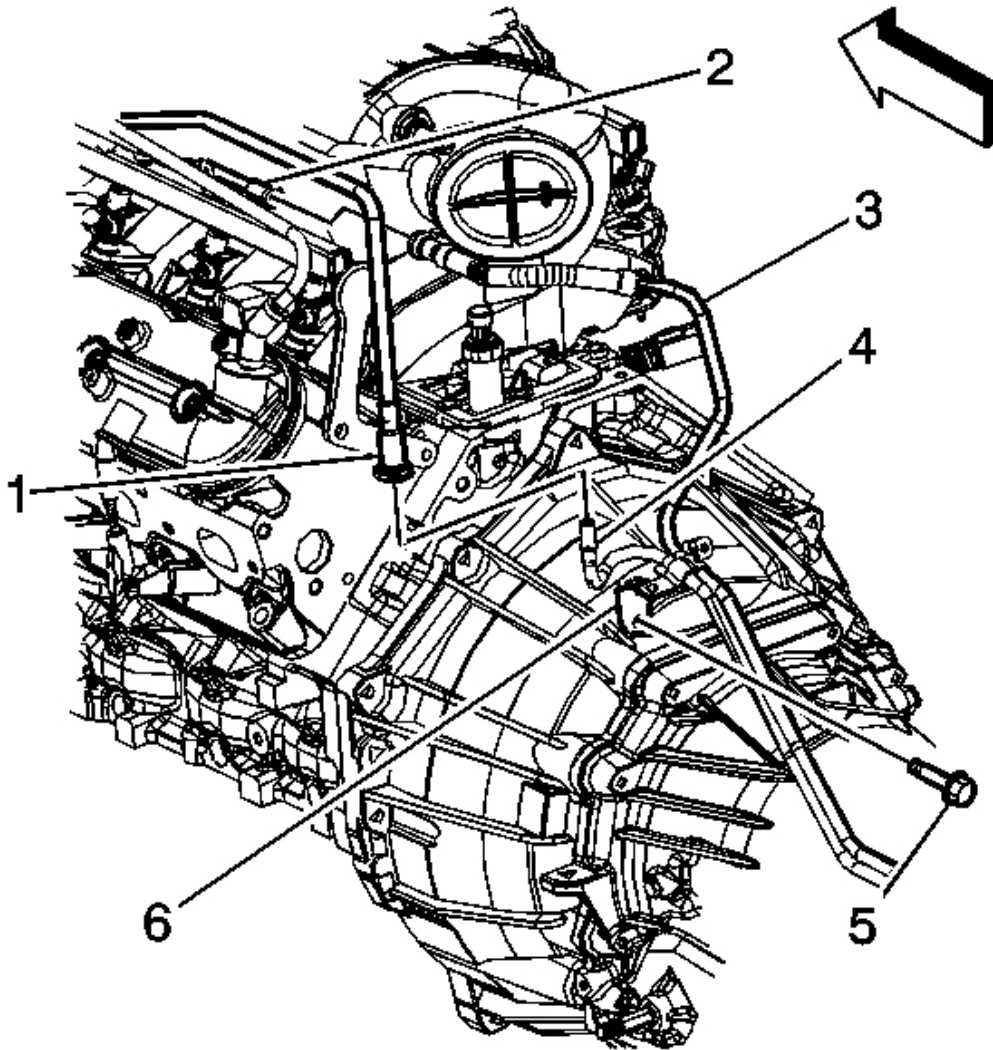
Fuel Feed Pipe From/To Fuel Rail
